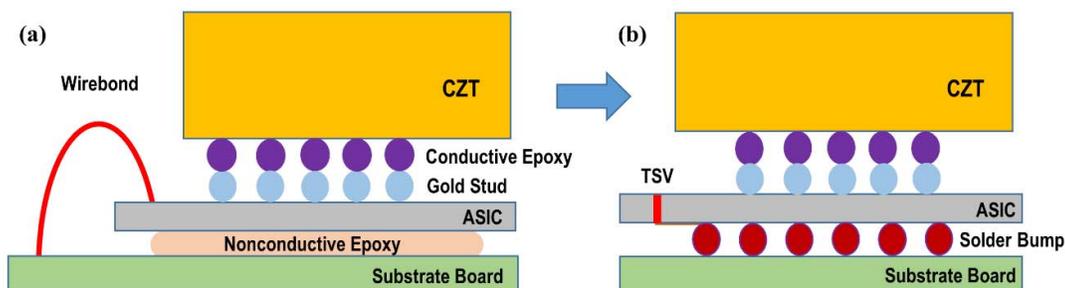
(a) A CZT/ASIC assembly using traditional wire bonding to the substrate board (b) A CZT/ASIC assembly with TSVs in the ASIC chip providing connections to the substrate board [7]. The ASIC has 87 wire bond pads along one edge of the 20 mm chip. TSVs are inserted between pads.
